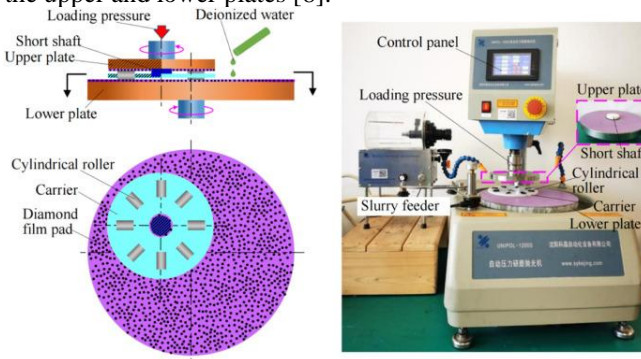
Grinding principle and equipment used for double-sided grinding using DFP [8].
